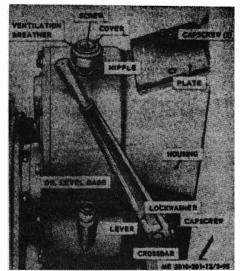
Auxiliary clutch lever and ventilation breather, removal points.
